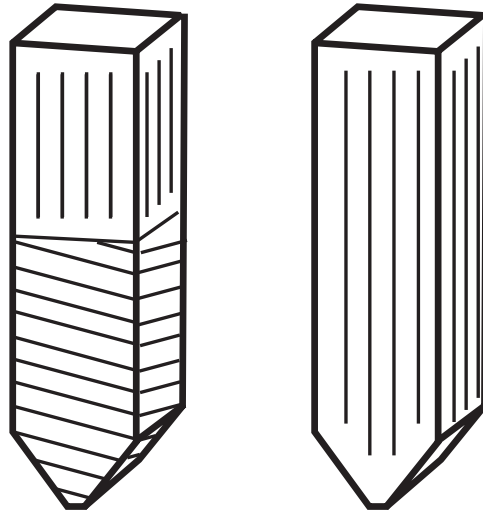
Types of tube designs in the boiler combustion chamber: spiral (left) and vertical (right)
